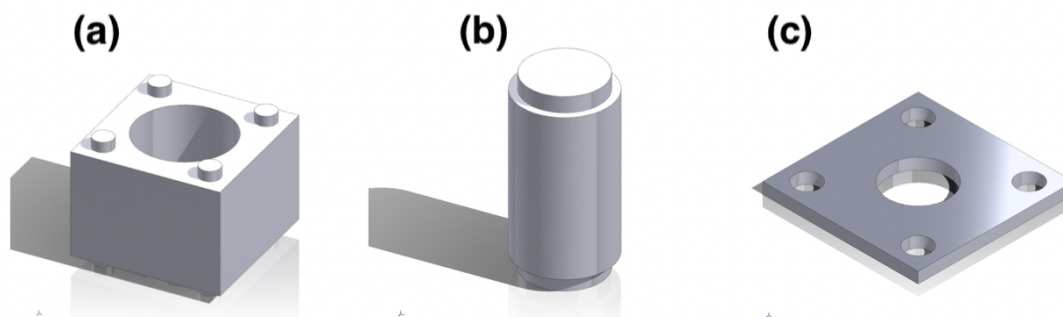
Isometric view of the final version of the mold used to cure bioplastic. The mold consists of three parts: (a) Mold body. (b) Inner cylinder. (c) Cover for top and bottom (total of two to cover both sides). All pieces are printed with a Form 3 3D printer. Part (a), (b), and one piece of (c) are assembled first. Bioplastic solution is poured into the vacant space from the top. The other piece of part (c) is then assembled on top to secure parts (a) and (b).
